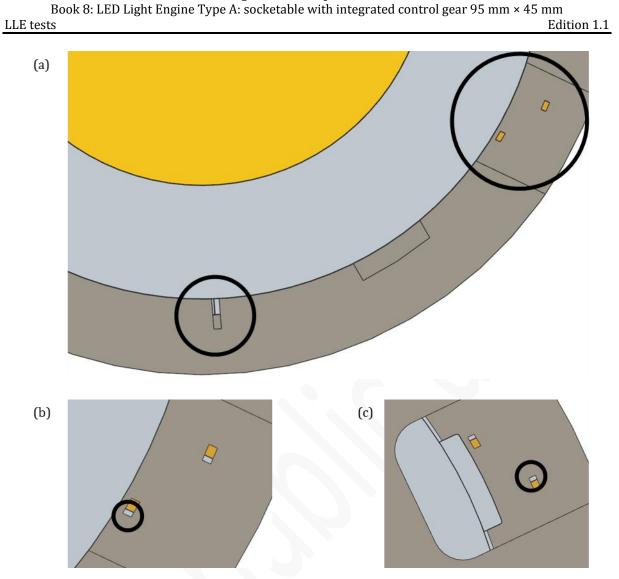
Examples of (a) test #4(a) pass, top view; (b) fail, top view; and (c) fail, bottom view
